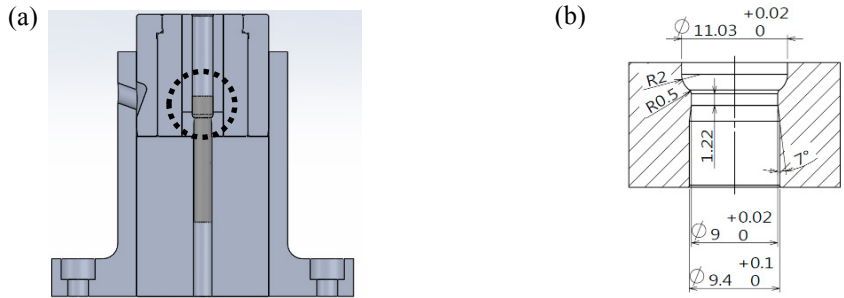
Forward extrusion die (a) Sectional view of die; (b) Detailed view of die with dimension of forming section
